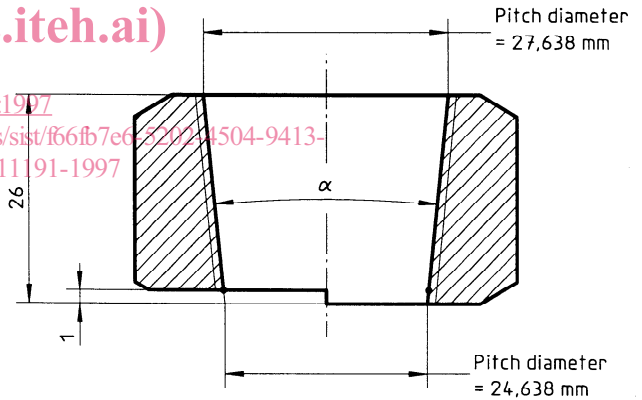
Threaded ring gauge for pitch diameters "I-8"
